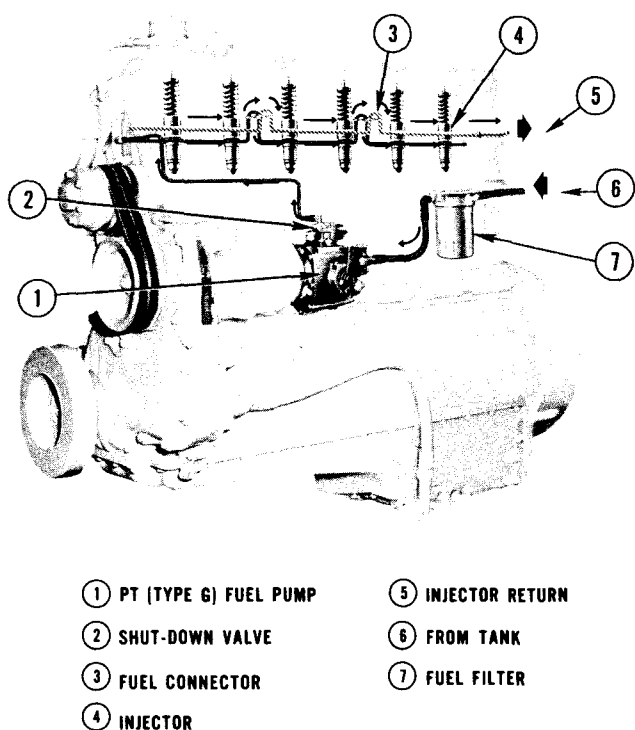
, (FWC-13) Fuel flow diagram - PT (type G) pump - Inline
